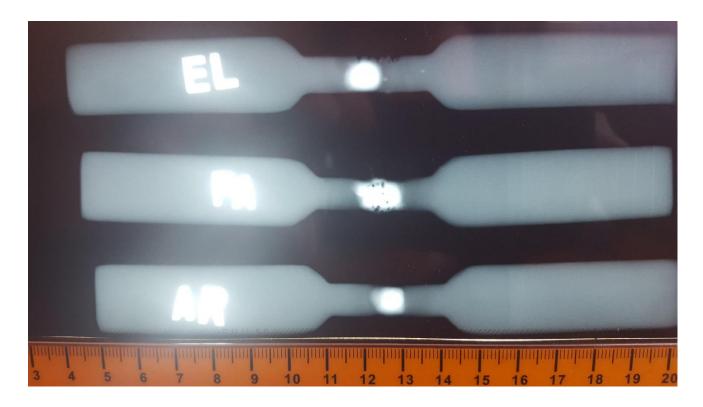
Photo with welding imperfections acquired during RT inspection
